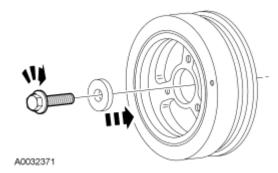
Installing Crankshaft Pulley Bolt & Washer Courtesy of FORD MOTOR CO.
